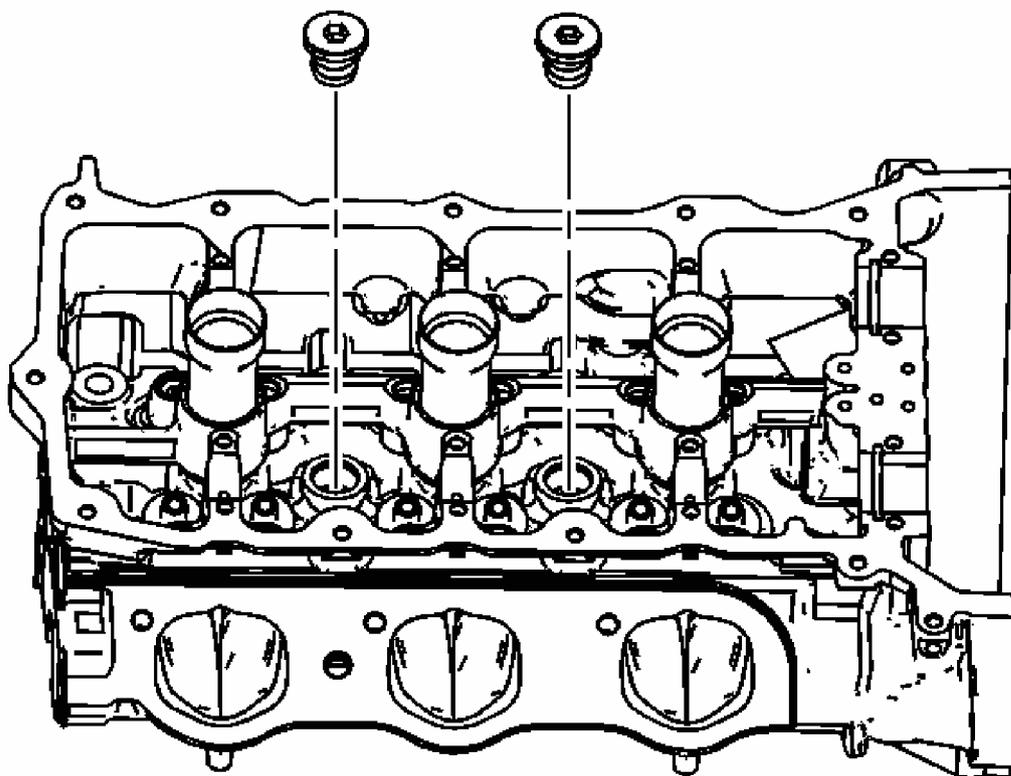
Locating Cylinder Head Coolant Threaded Plugs
